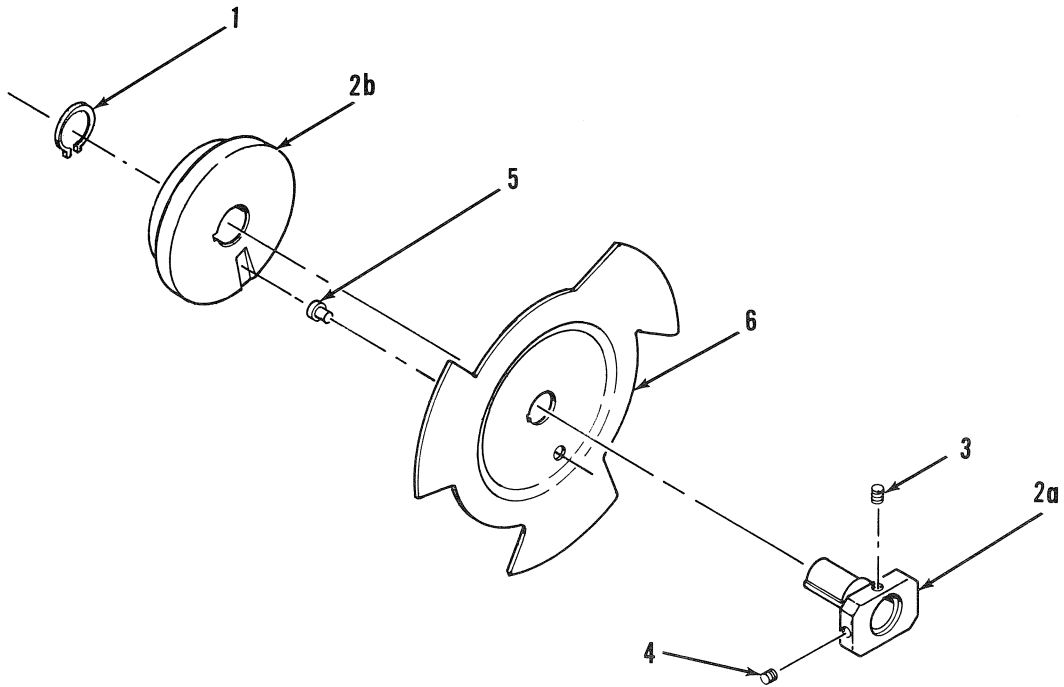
SHUTTER AND CAM ASSEMBLY
